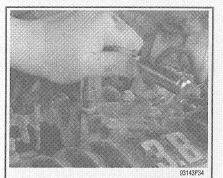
Loosening the 4 center bolts (long) holding the intake manifold in place
